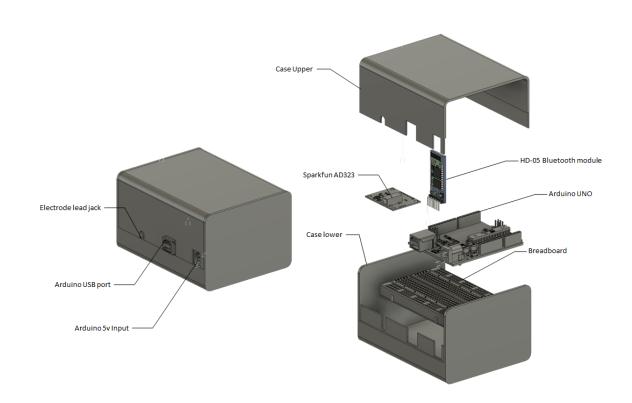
Final Fusion 360 CAD design of outer casing of device
